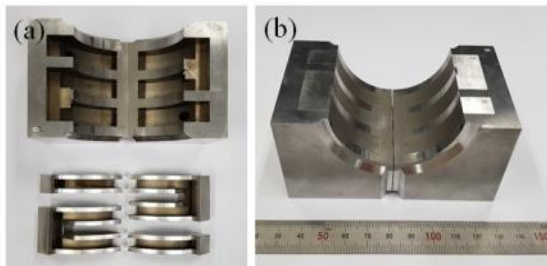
(a) Machined core parts and coupons and (b) assembled test mold core
